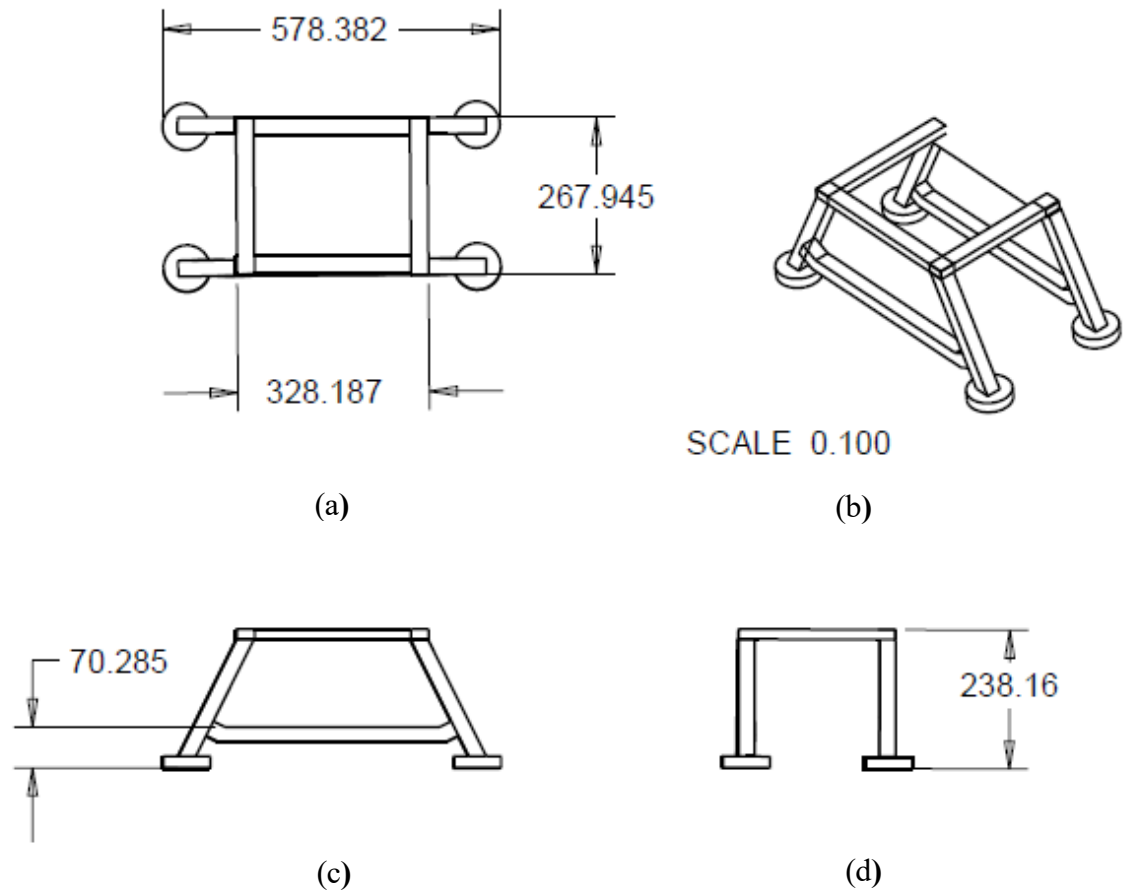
Frame(a) Top view, (b) Isometric view, (c) Front view and (d) Side view
